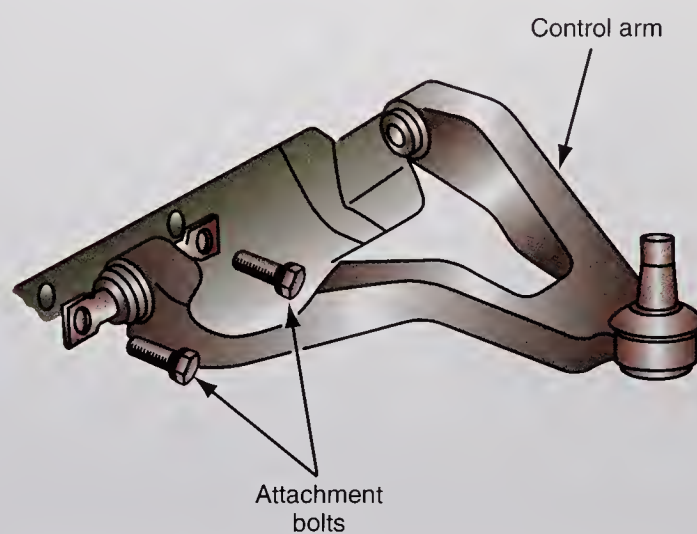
Removing the bolts from the front side of the lower control arm.
